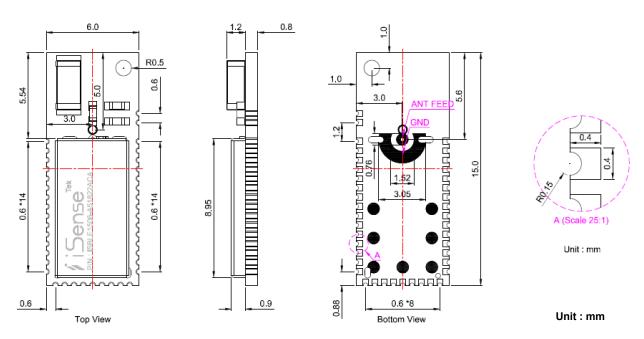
Product Dimensions (ISBLE1506-A51xxxxxA)
